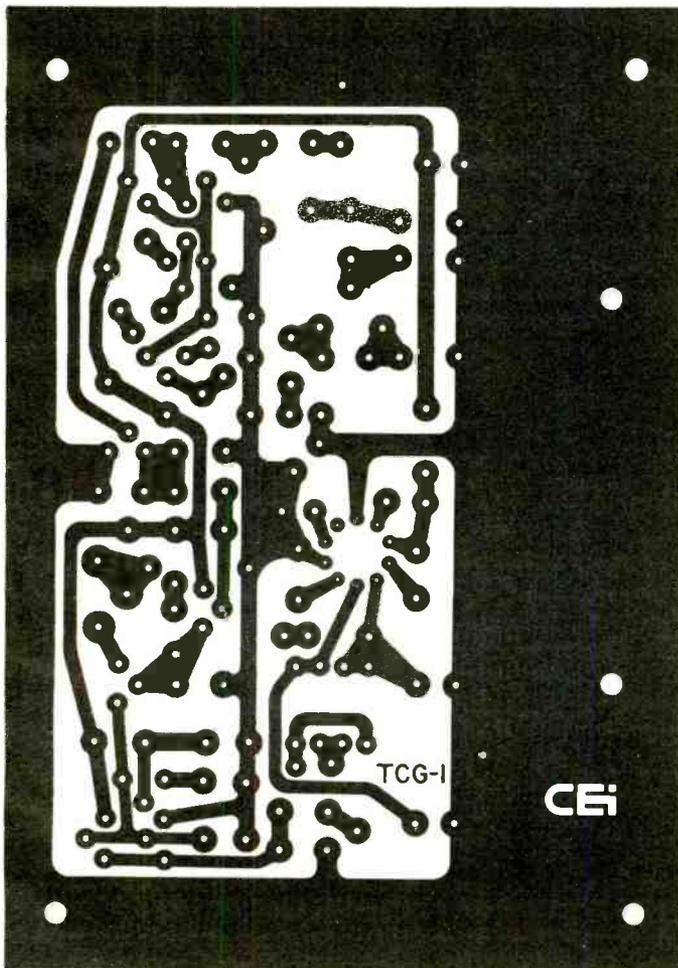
THE PRINTED-CIRCUIT board pattern, as viewed from the copper side, is shown here actual size. The board measures $3\frac{1}{2}'' \times 5''$.
